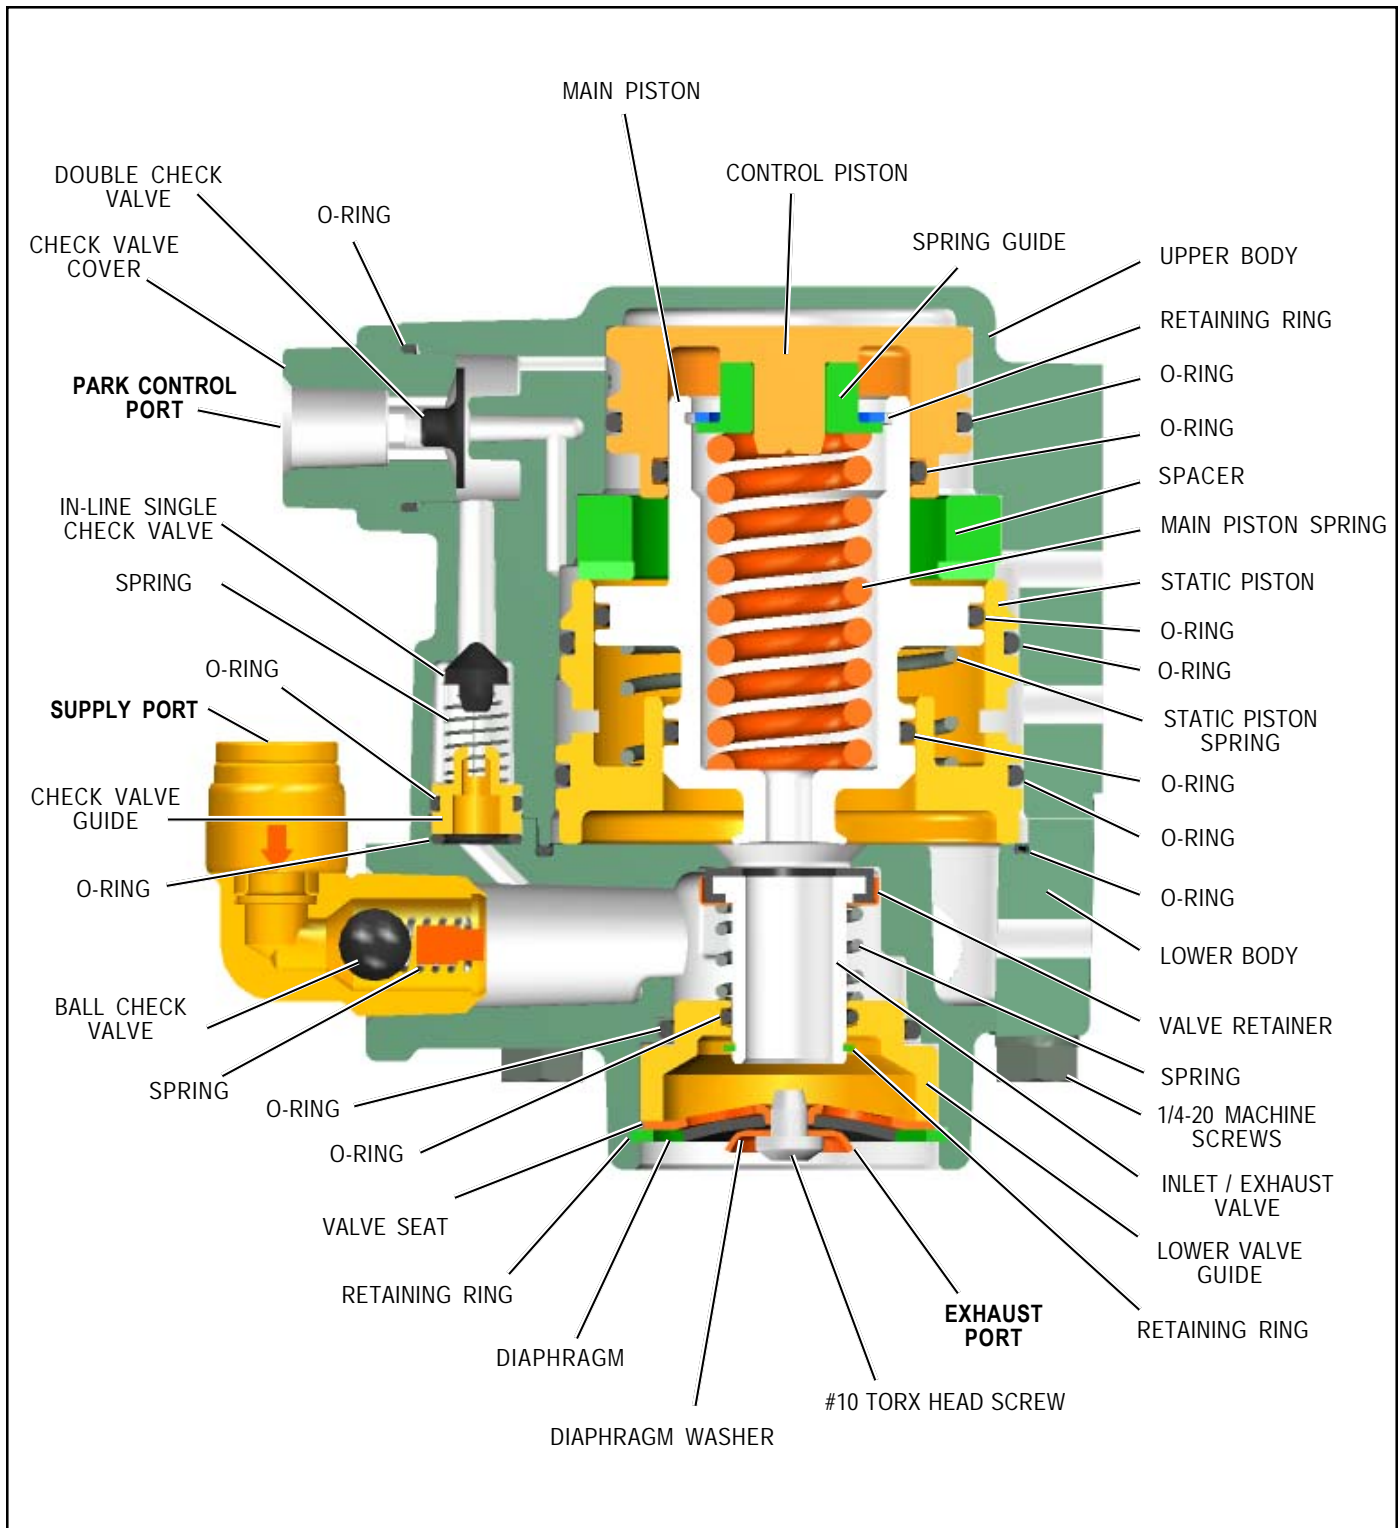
SECTIONAL VIEW OF SR-7 USED IN RELAY VALVE APPLICATIONS
